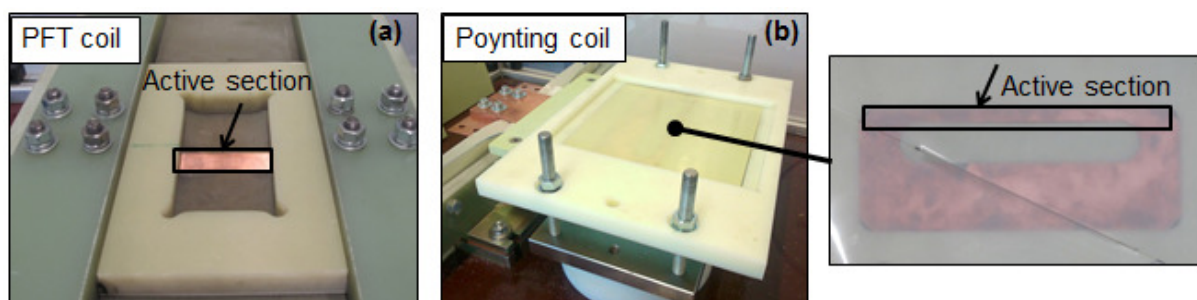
Coil for sheet forming or welding (Source: BWI)
